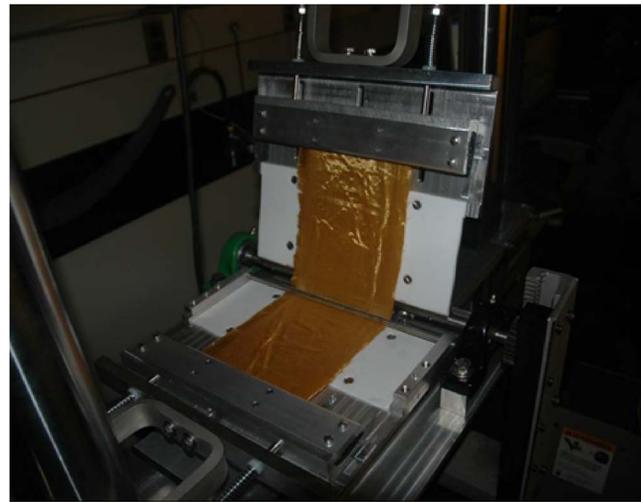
Folding device with fabric clamped in the sliding brackets and around the folding rod
